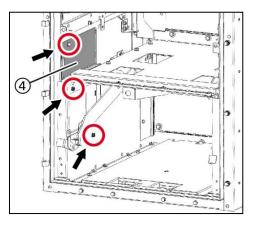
3 bolted joints on wiring duct cover, panel width 800 mm
